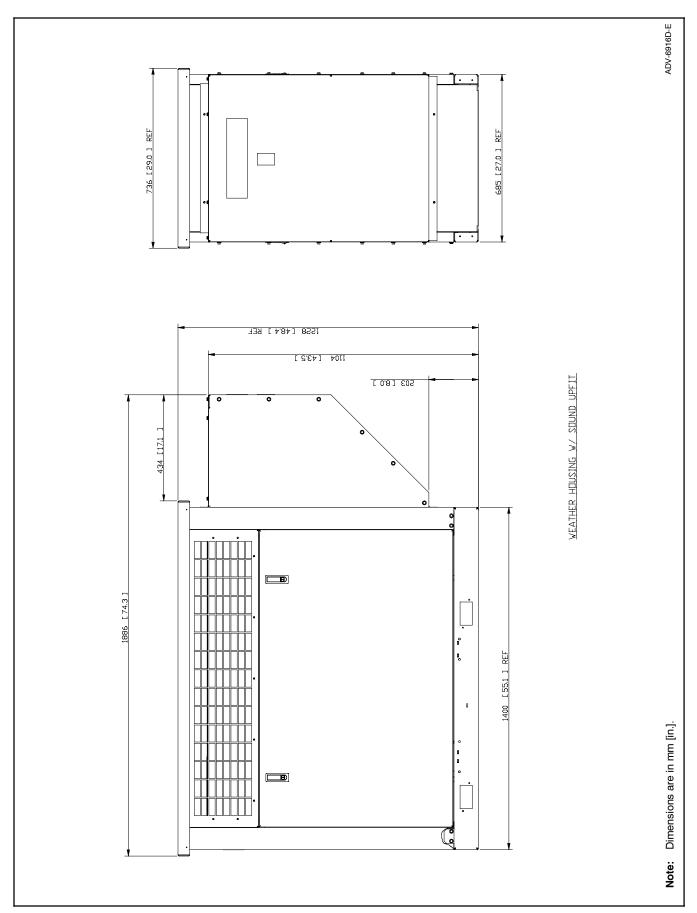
Dimension Drawing, ADV-6916D-E, Sheet 4, Weather Housing with Sound Upfit Kit
